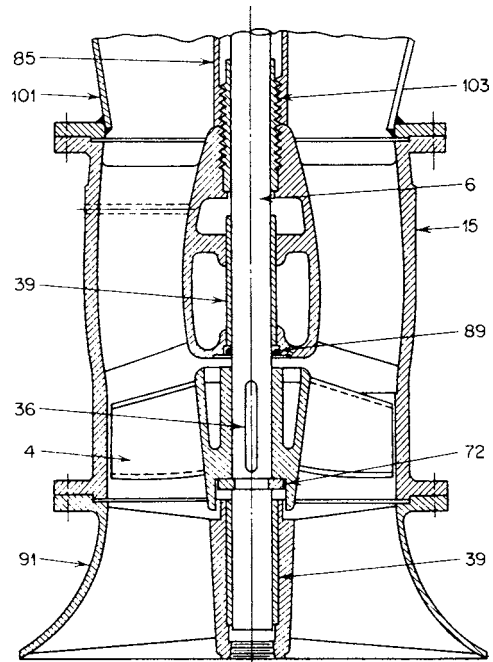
Vertical wet-pit diffuser pump bowl assembly with an axial-flow impeller (Numbers refer to parts listed in Table 14.2.1.)
